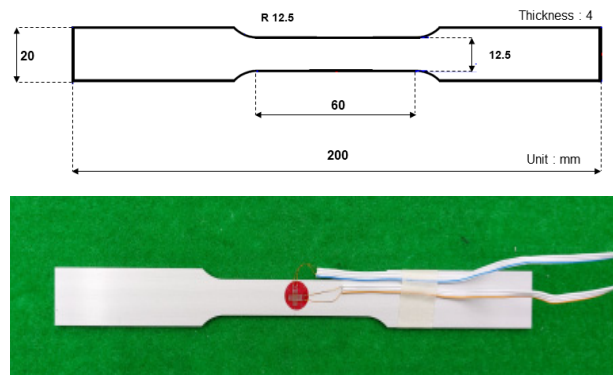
Room-Temperature Tensile Specimen (Al6063-T5)
